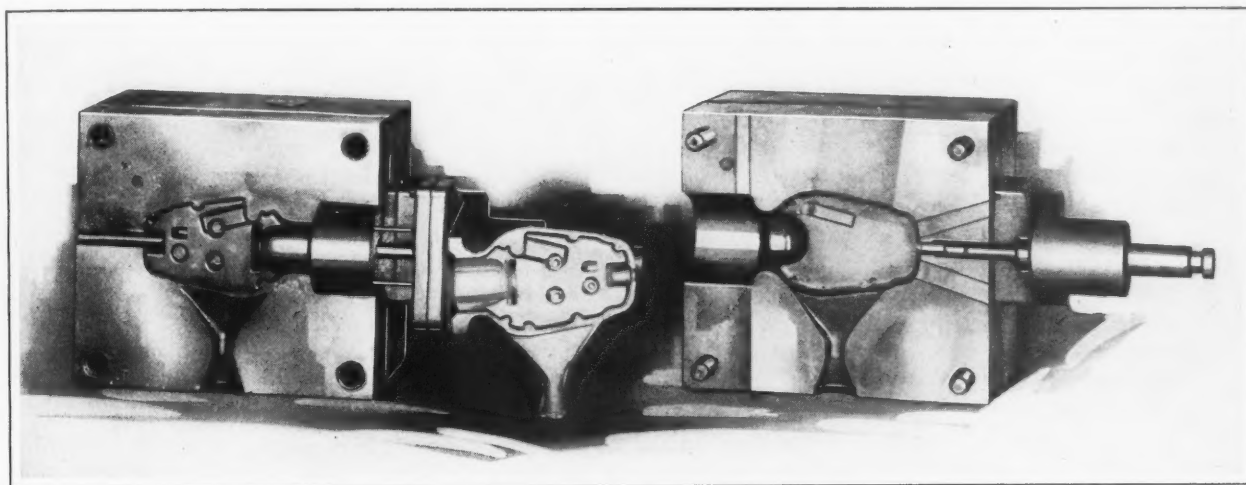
Simple Die Employed for Producing a Thin Part Having a Circular Flange at One End
